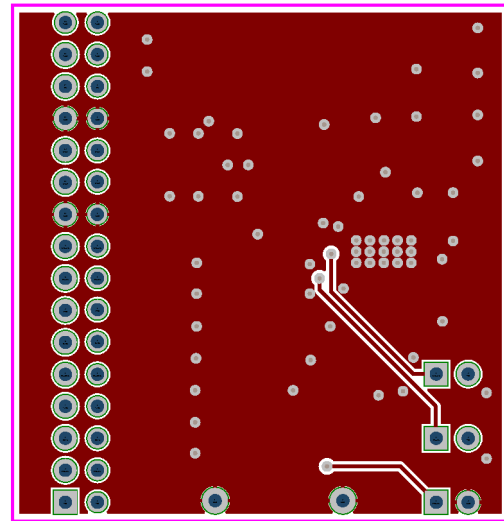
NCV7450 EVB PCB Bottom Drawing (Bottom View)
